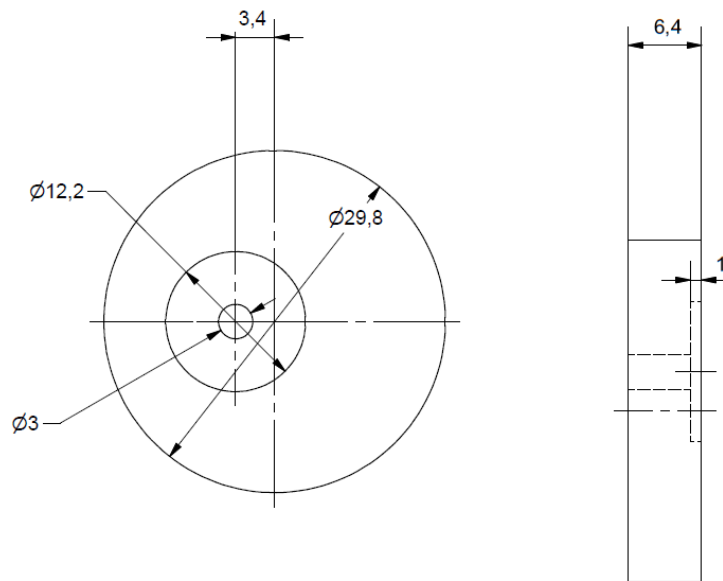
Technical drawing of the PEEK Holding of the source, which is hold on top of the magnet with the holding structure shown in figure 5.5.
